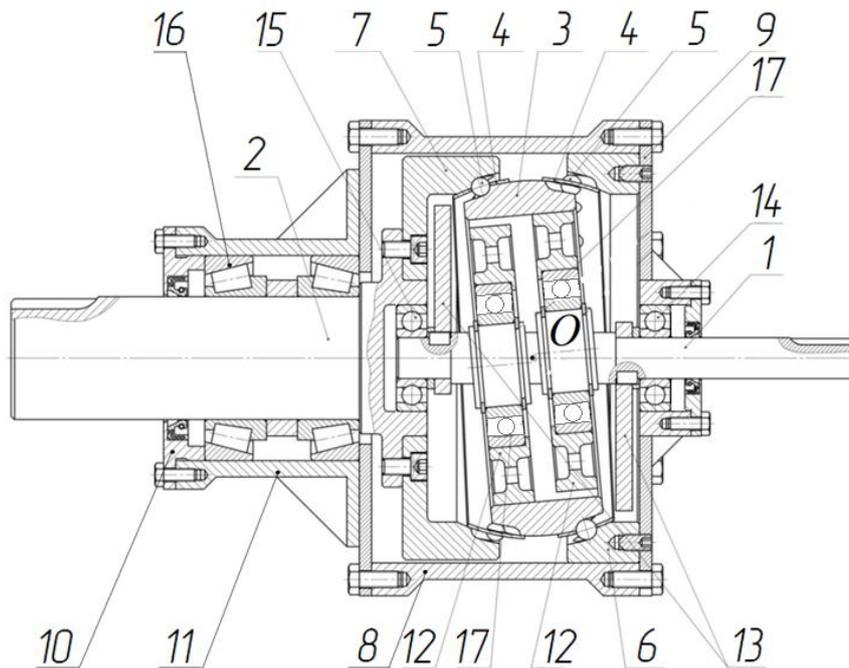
Industrial sample of the double-reduction gear mechanism: 1 – input shaft, 2 – output shaft, 3 – precessional wheel, 4 – separator, 5 – balls, 6 – idler wheel, 7 – idler wheel, 8 – housing, 9 – cover, 10 – cover, 11 – cartridge, 12 – disks, 13 – disks balancers, 14-15 – bearings
